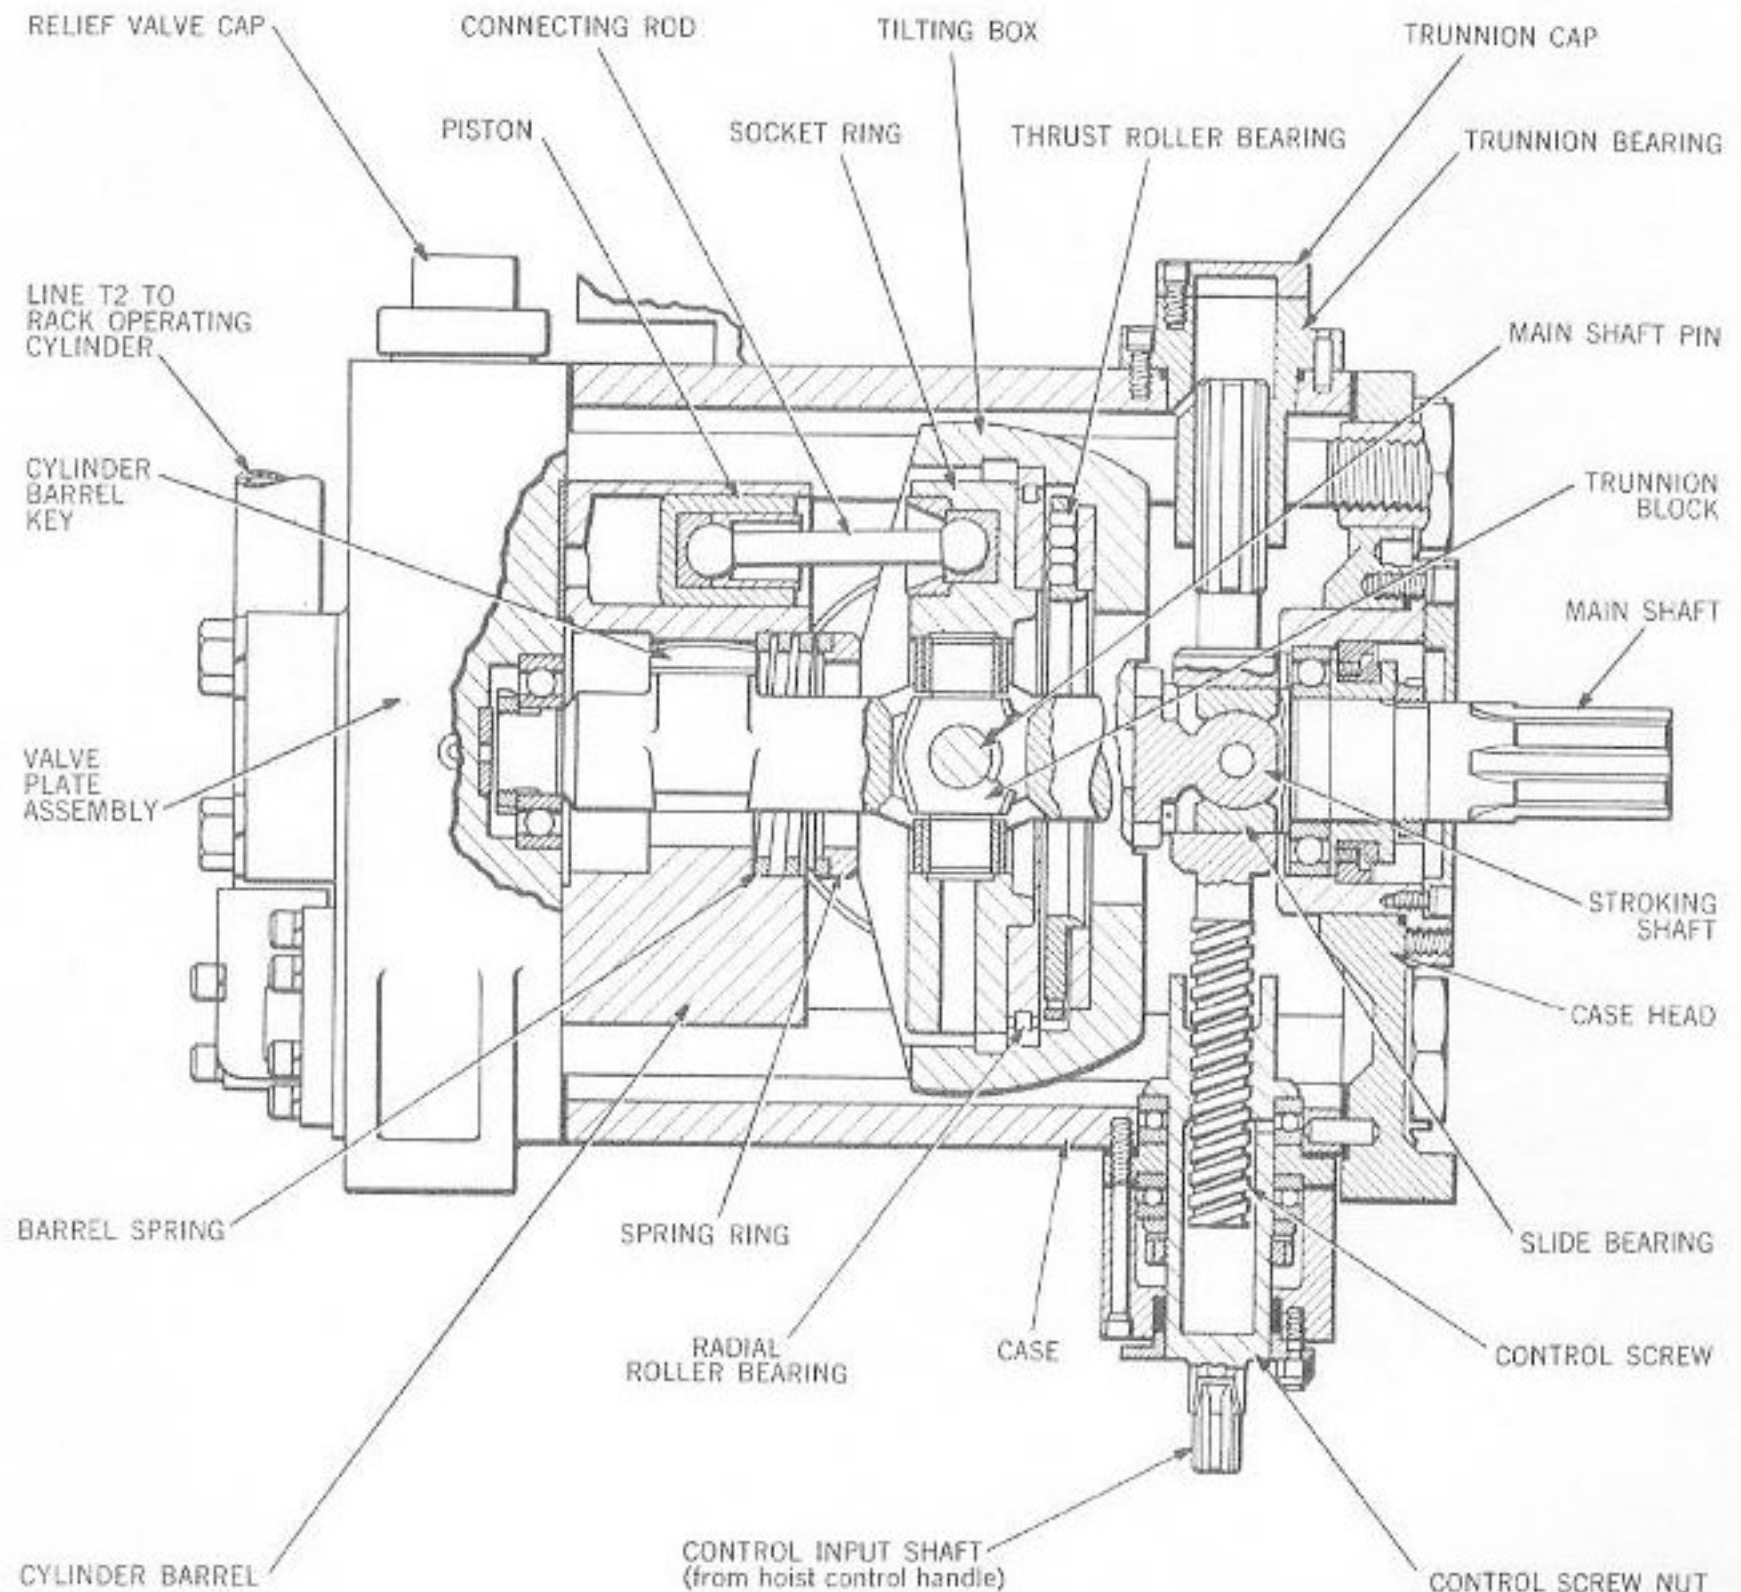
Projectile Hoist Main Hydraulic Pump - Sectional View
